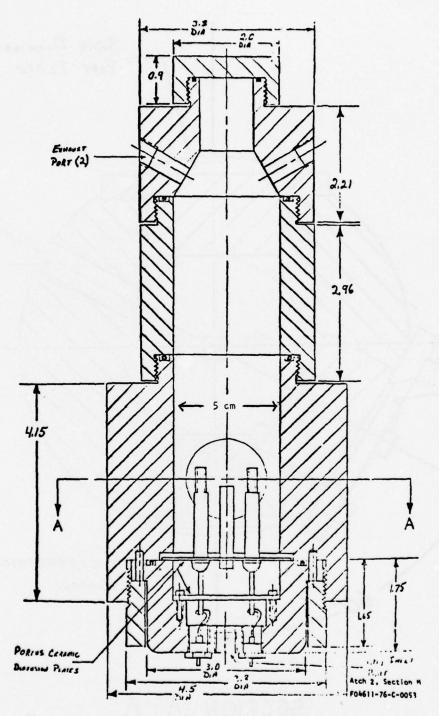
Engineering Sketch of RPL Window Combustion Bomb.
